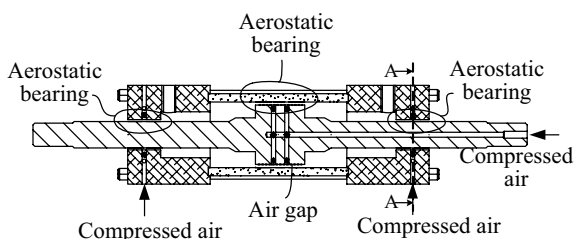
Scheme of the pneumatic cylinder embedded with aerostatic bearings.
